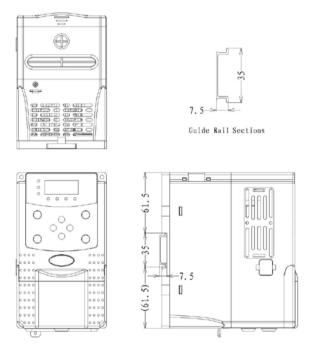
Schematic Diagram for Physical Dimensions and Mounting Dimensions
